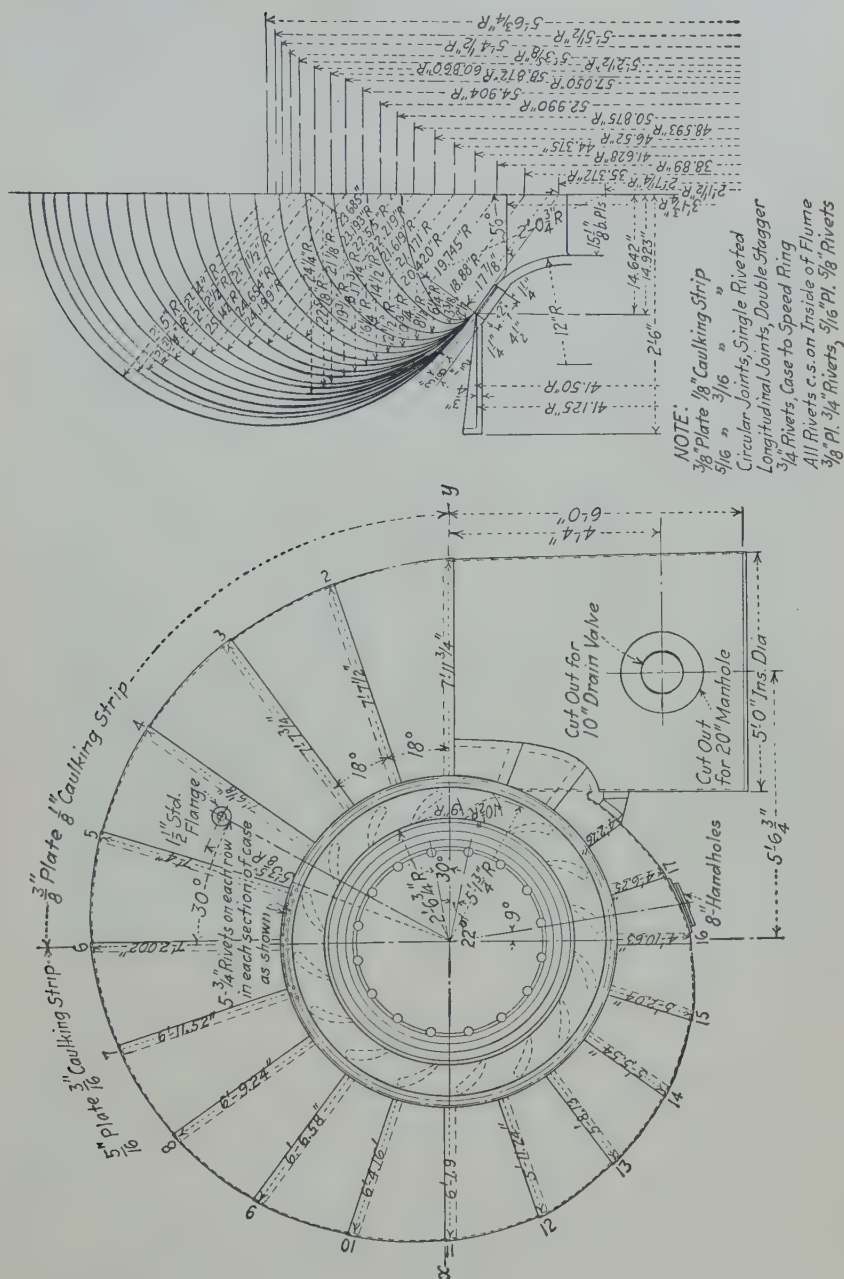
Details of plate steel scroll case—Estes-Rainbow Plant of J. & J. Rogers Co., Au Sable Chasm, N. Y.
